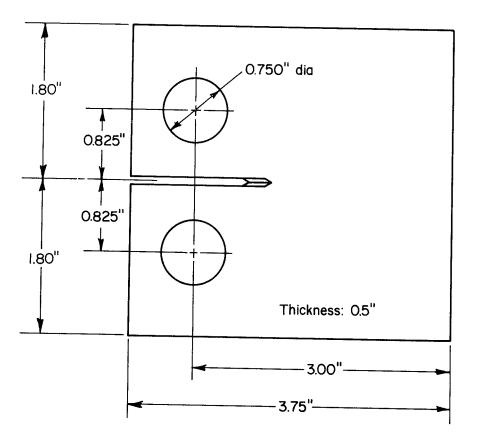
COMPACT TENSION FATIGUE CRACK GROWTH SPECIMEN
